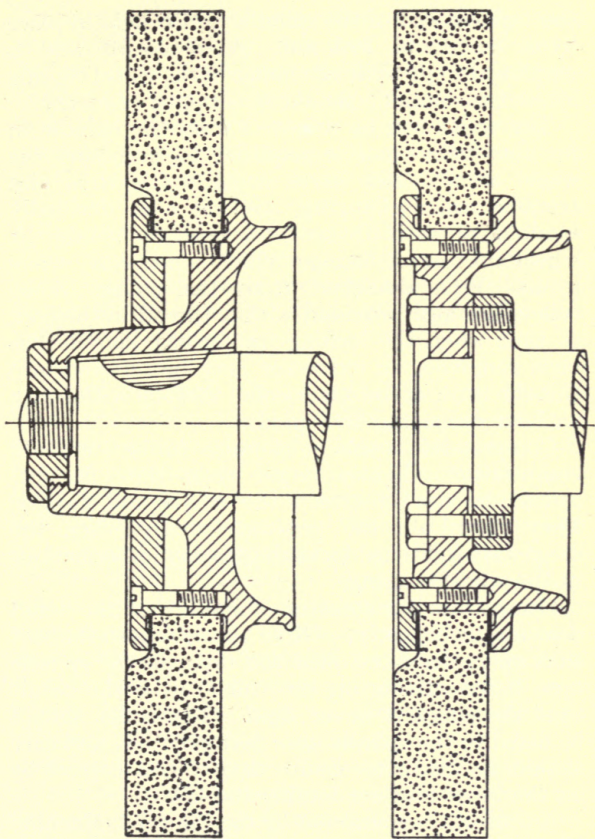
TAPER AND FLANGED SPINDLE NOSES
